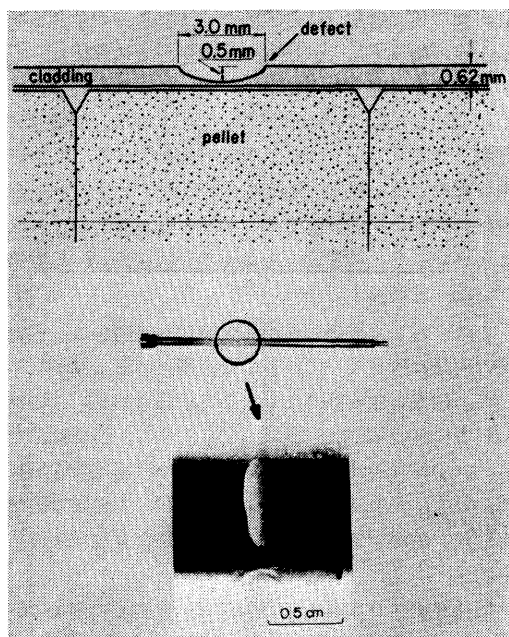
Fretting Corrosion Produced by Vibration
